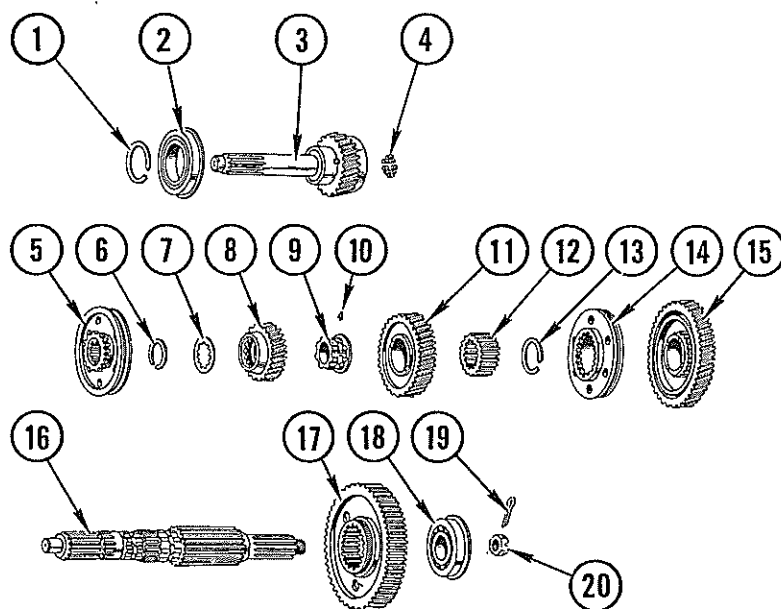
CLUTCH SHAFT & MAINSHAFT, EXPLODED VIEW
